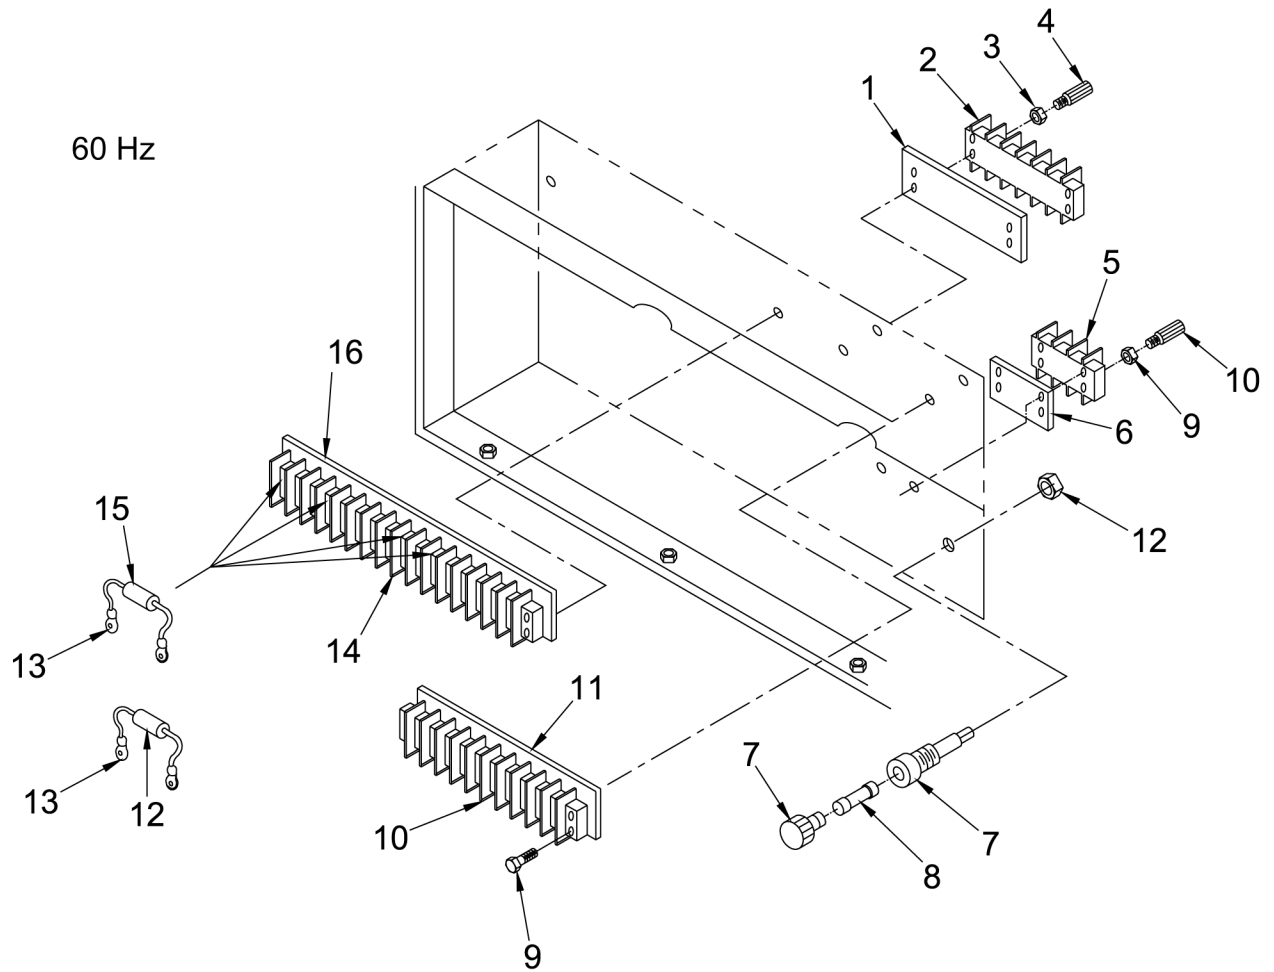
Control Box Assembly/Control Panel Assembly, (60/400 Hz) (Sheet 1 of 2).
